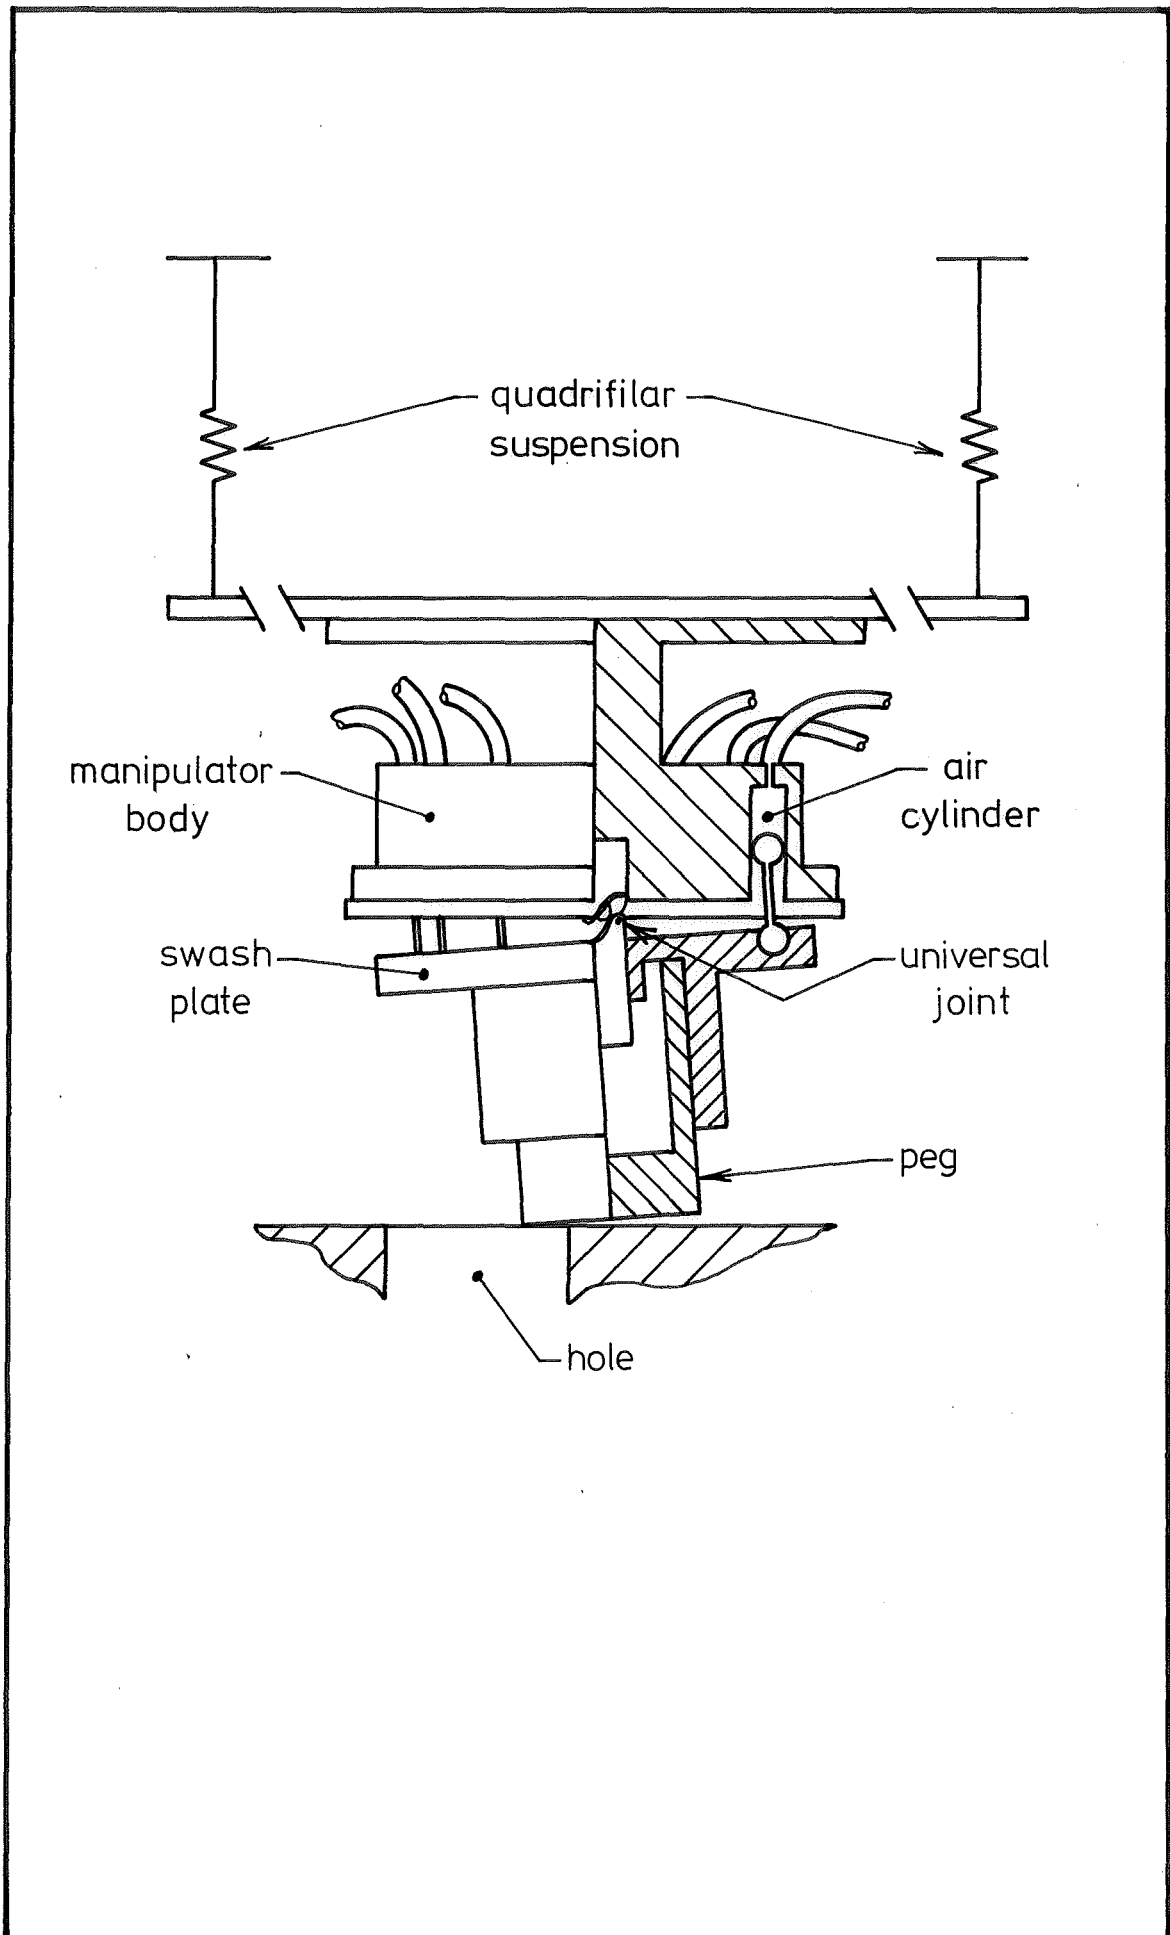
VIBRATORY ASSEMBLY TEST RIG.
